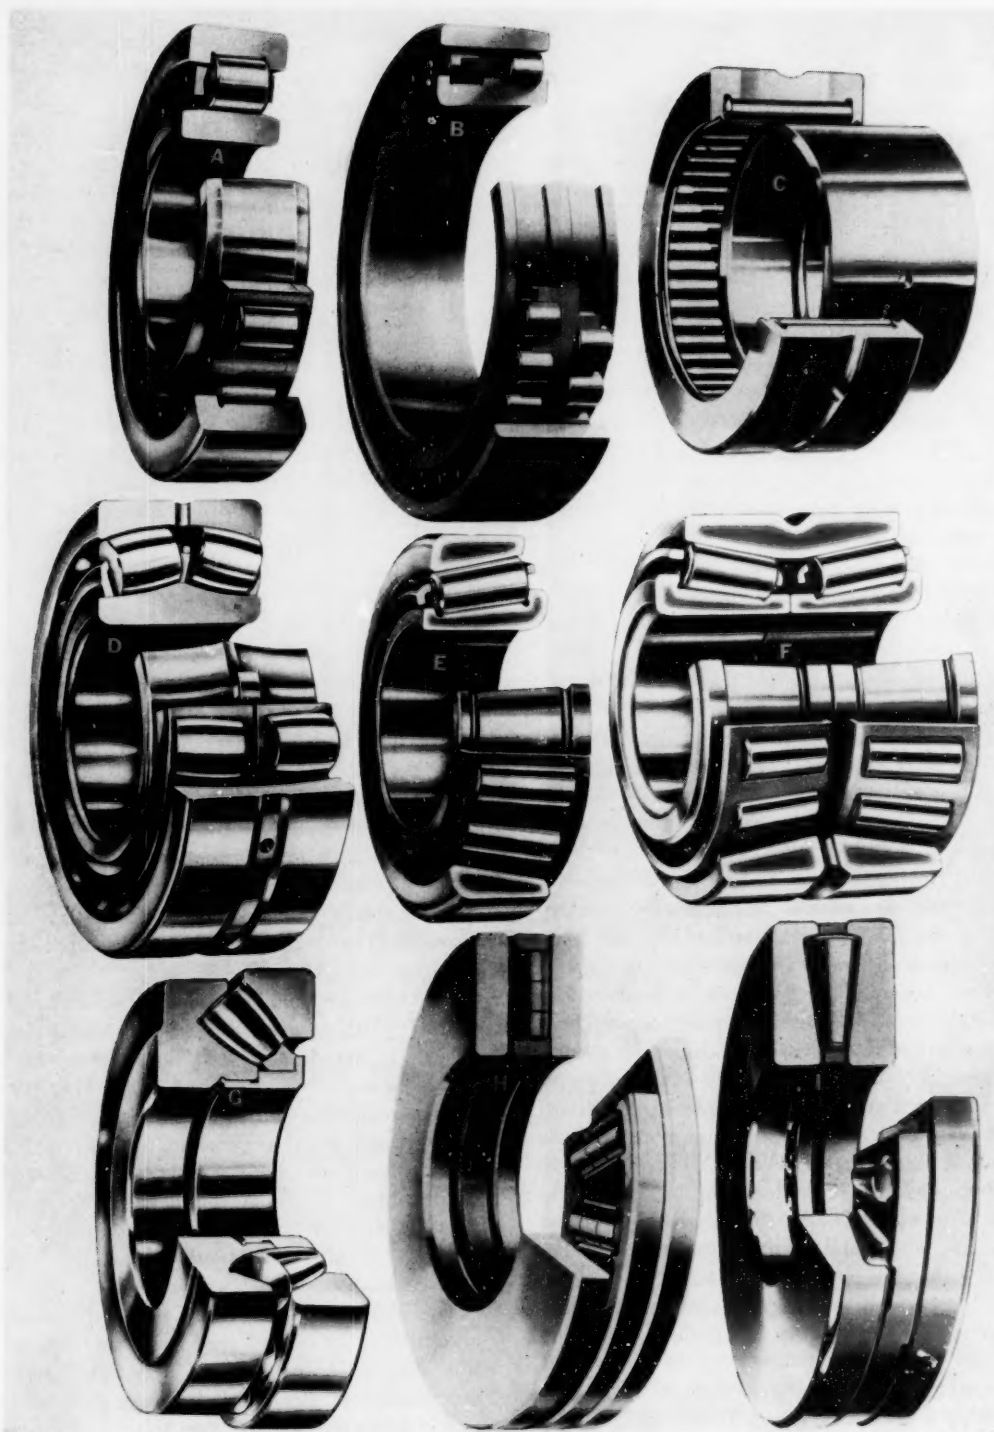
Roller Bearings. (A) Single-row cylindrical roller bearing; (B) Double-row cylindrical roller bearing; (C) Needle roller bearing; (D) Spherical roller bearing; (E) Tapered roller bearing; (F) Double-row tapered roller bearing; (G) Spherical roller thrust bearing; (H) Cylindrical roller thrust bearing; (I) Tapered roller thrust bearing.
